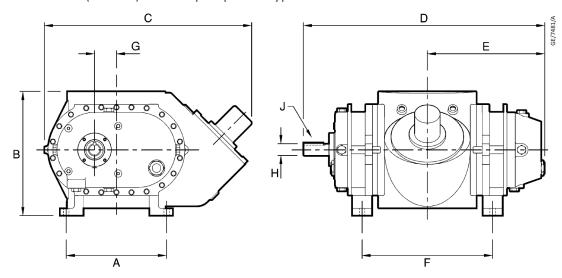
Bareshaft H (horizontal) booster pump with bypass valve dimensions
